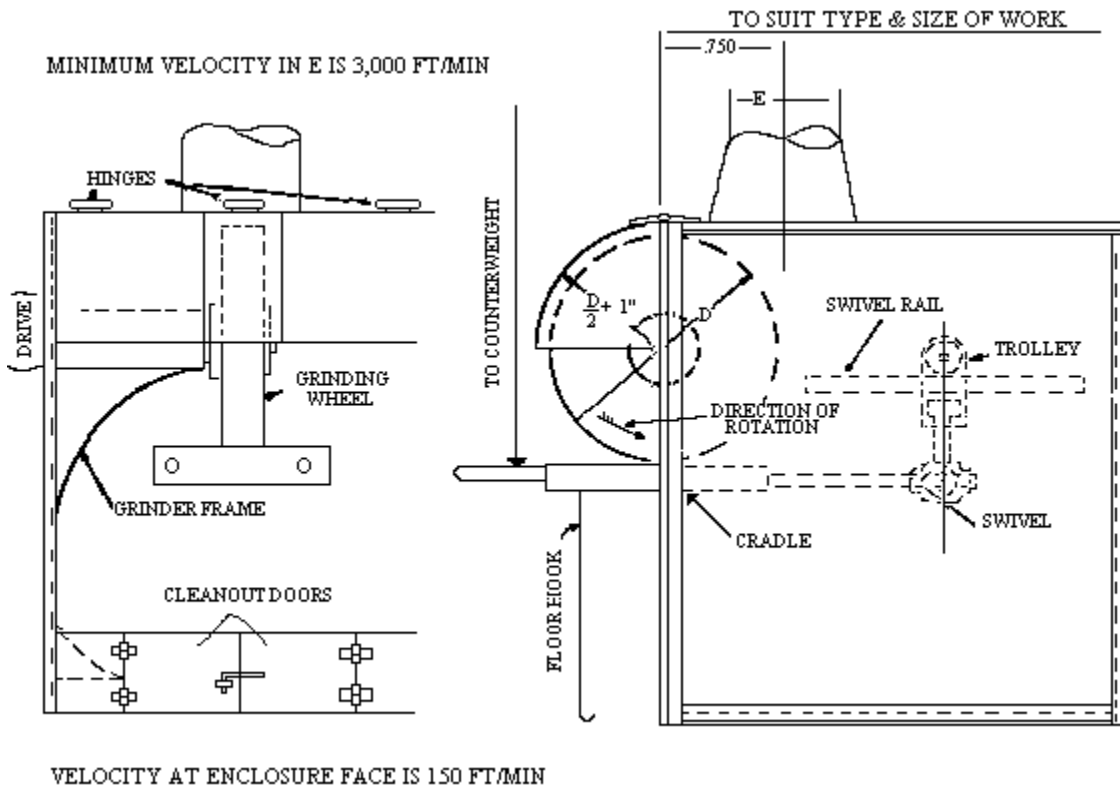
Cradle Polishing or Grinding Enclosure
